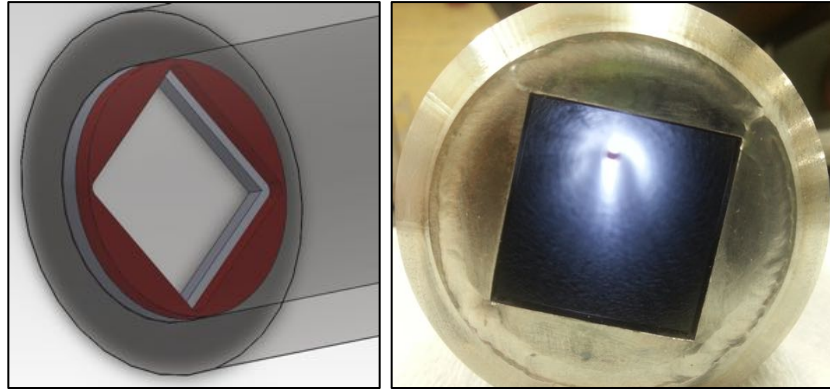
(Left) 3-D internal view of the support plate. (Right) Actual support place welded in place.
